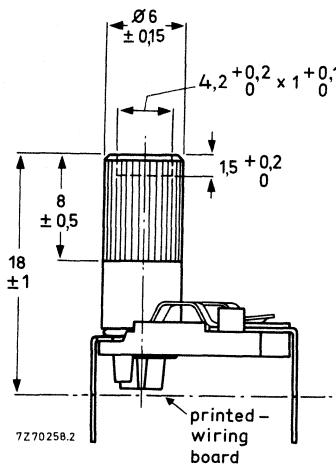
Test switch for horizontal mounting with adjustment knob at the side of the selector contact.
